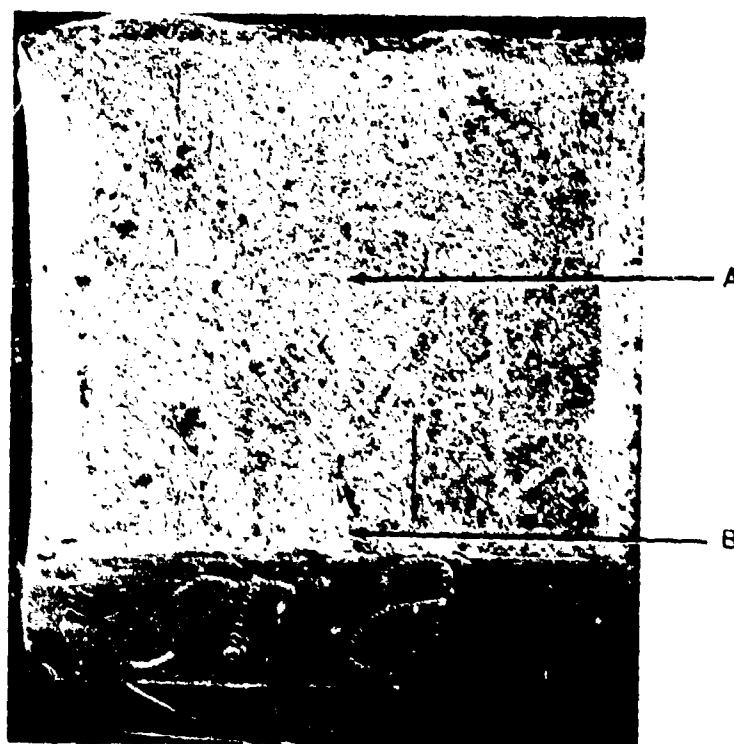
Fracture surface of an A-514 Charpy specimen tested at -83°C , 8x.
